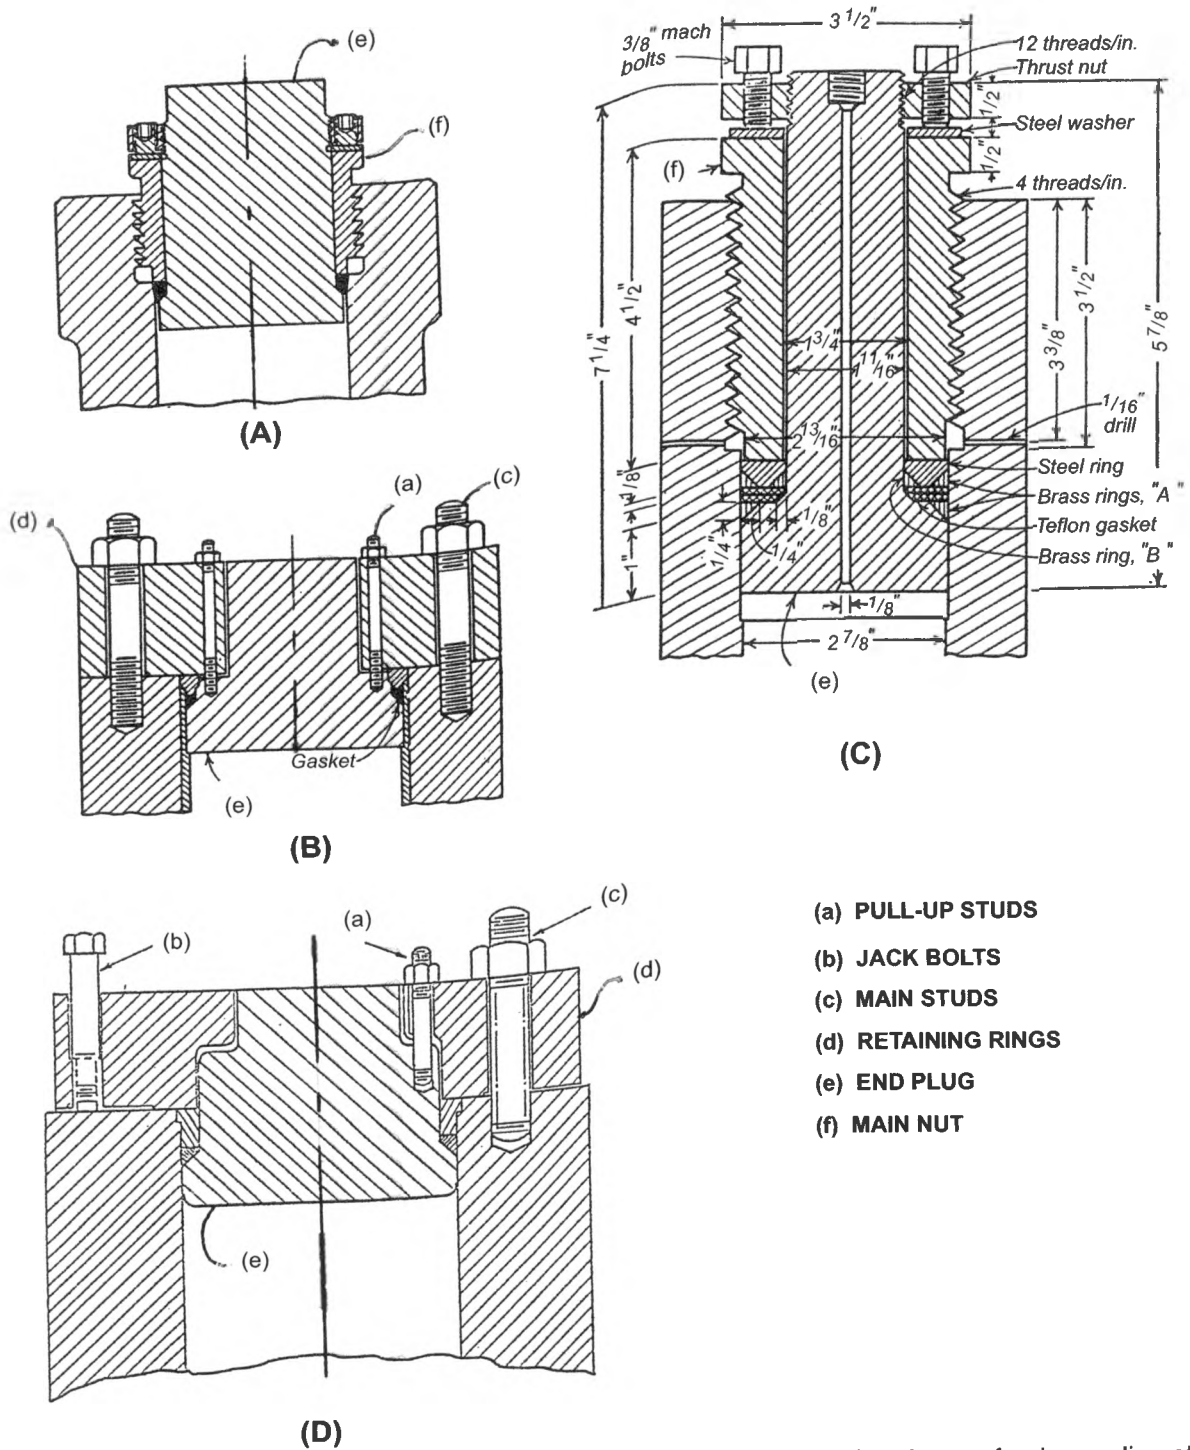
Bridgman type closures (A) Threaded plug type (B) Floating head type for large diameter heads (C) Modified type using rings to prevent extrusion of the gasket (D) Studded outlet with floating head.
